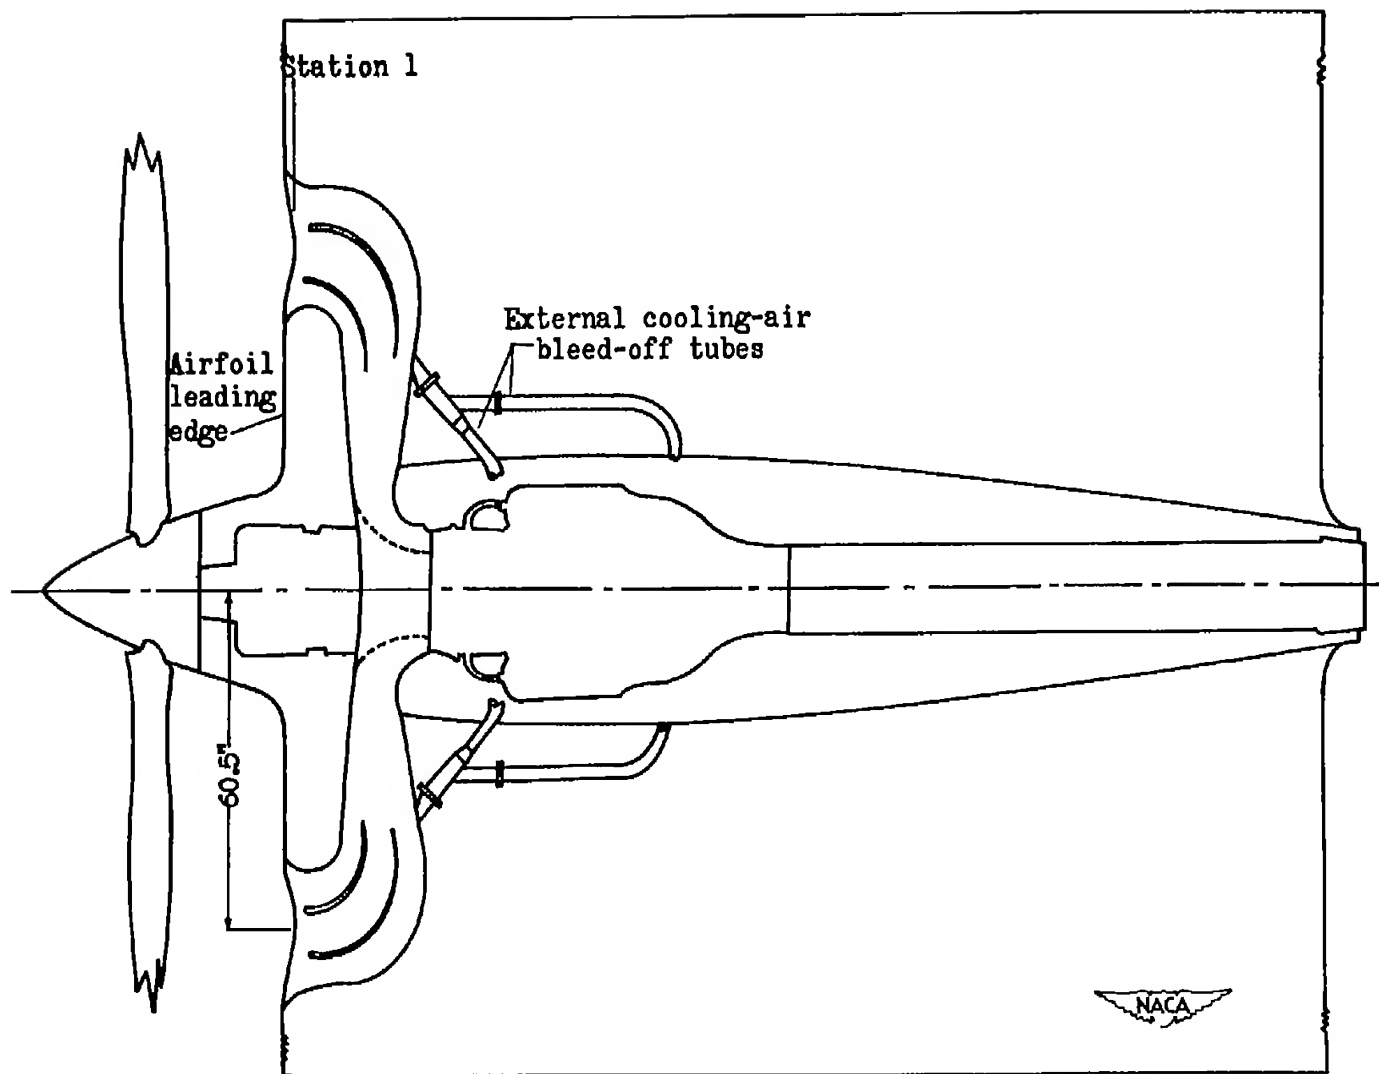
Sketch of axial-flow gas turbine-propeller engine installation showing location of wing ducts and inlets.
